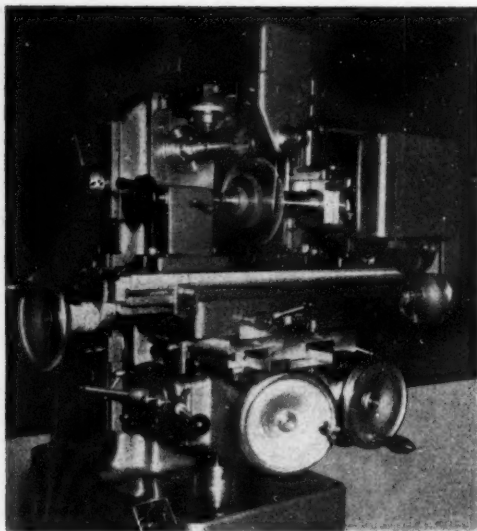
Rigiva horizontal mill with a hobbing attachment for spur and helical gears
